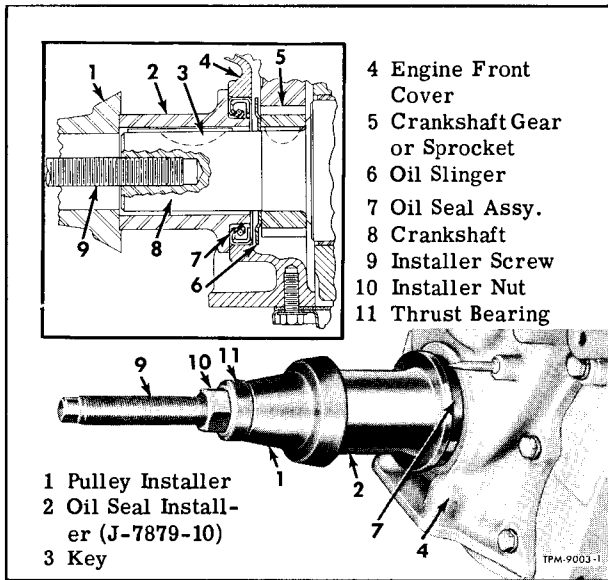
Front Cover Oil Seal Installation (with Cover Installed on Engine)
